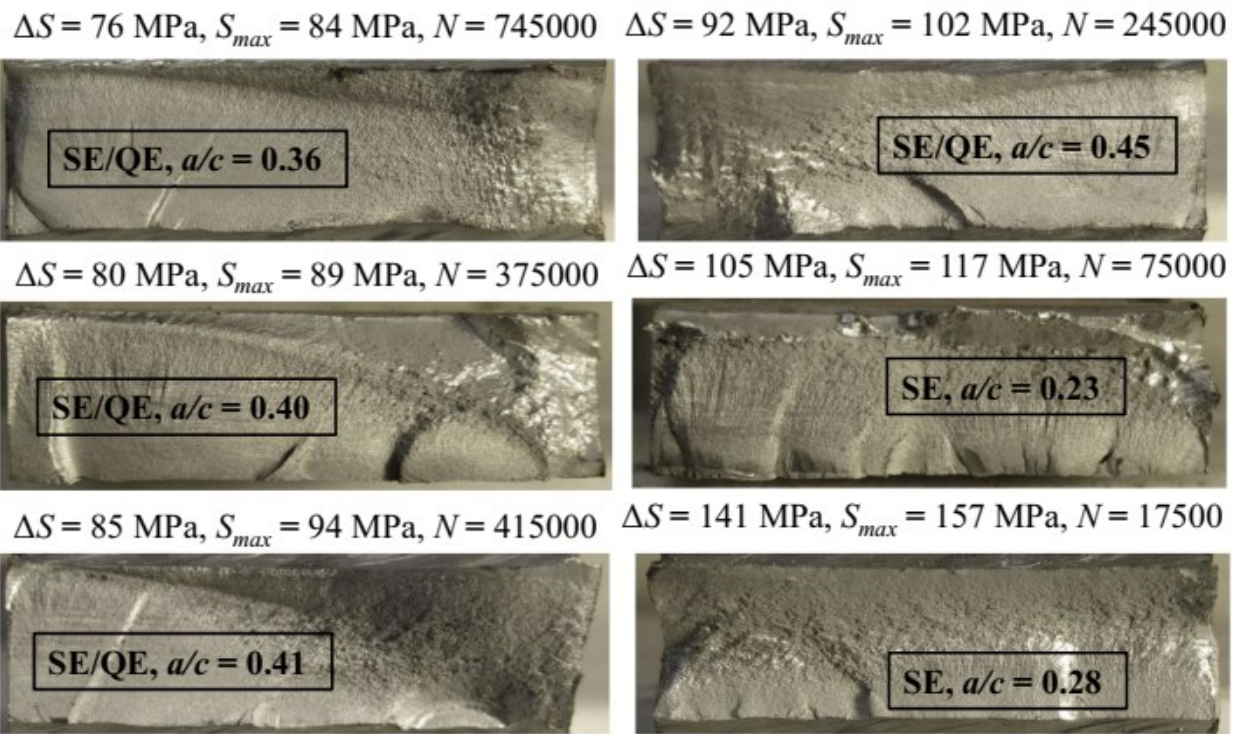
Fracture surfaces for as-welded aluminum specimens under CA loading
